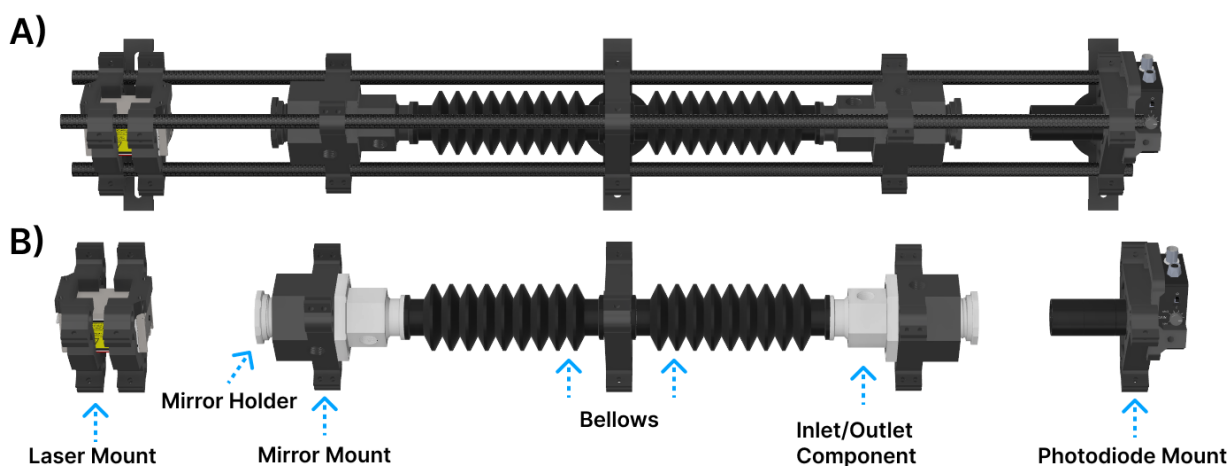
Block diagram of the kinematic system CRDS. A) Complete cage system. B) Cage system with the carbon rods removed and labeling of parts.
